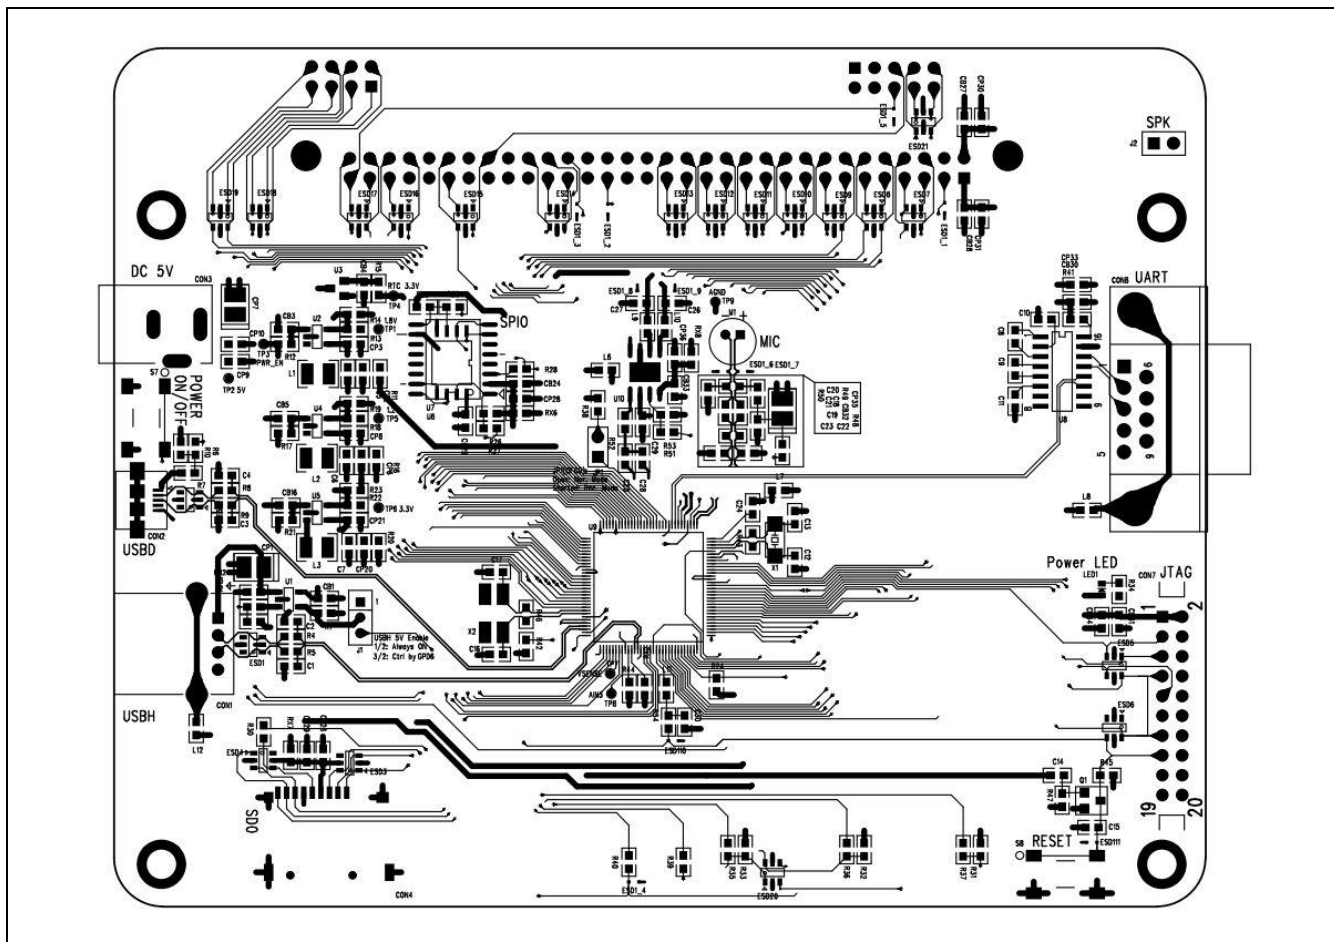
NuDesign HMI-N9H26 PCB Placement (Back)
